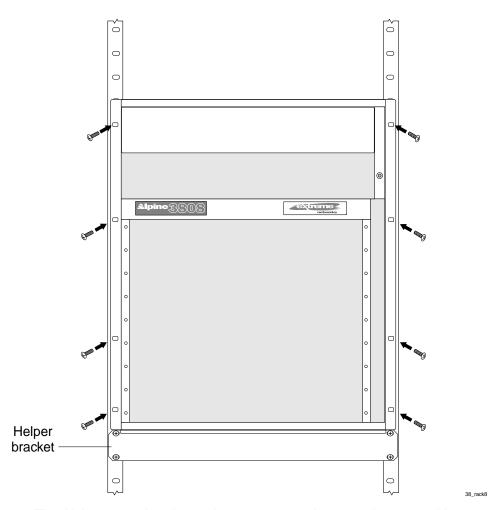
The Alpine 3808 chassis requires 8 screws to be securely mounted in a rack
